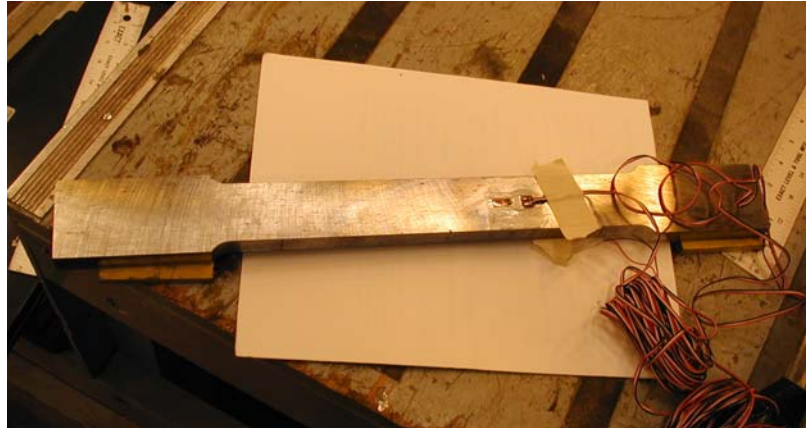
Welded Tensile Coupon Test Specimen before Testing
